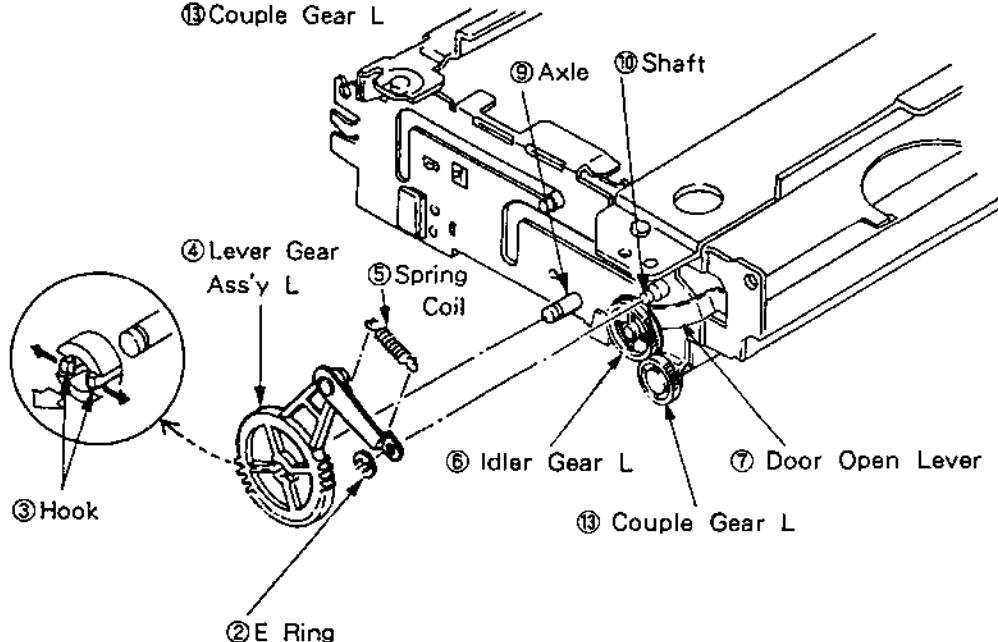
Cassette Drive Gears (Left Side)
